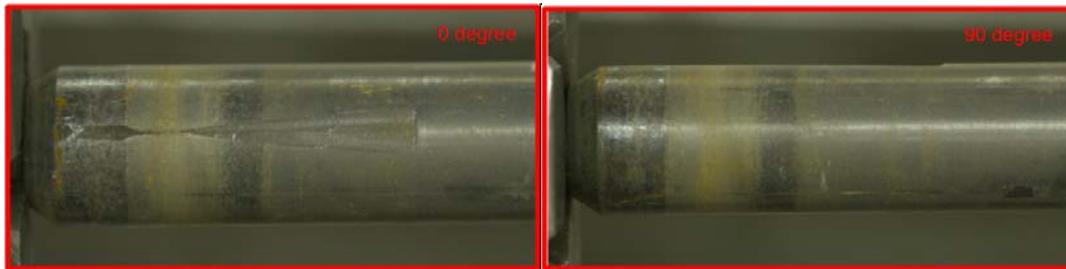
Fretting Mark for YQ-005U-N04 fuel rod
